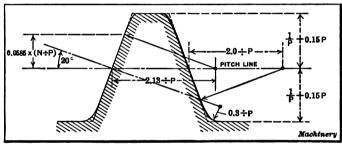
Hob Tooth for generating a 20-degree Involute Milled Tooth
